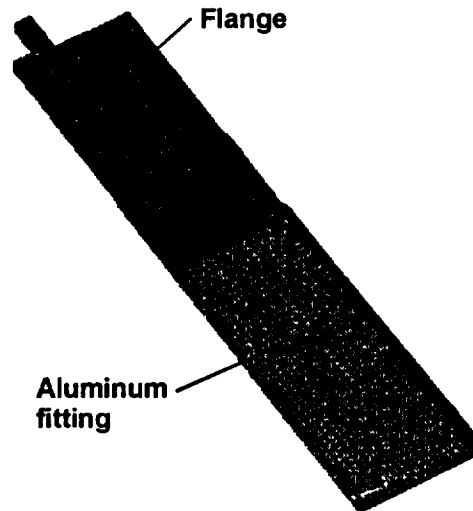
Lower view of initial stringer-doubler-fitting configuration.
